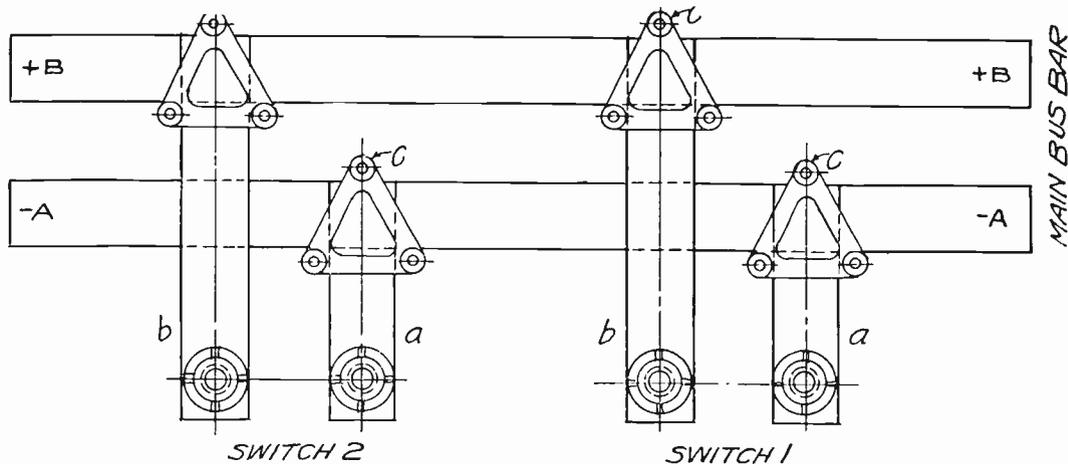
Bus bars can be connected together by means of special clamps as shown above. These clamp pieces are held securely gripped to the busses by means of short bolts through the holes in their three corners. Clamps of this type save the trouble of drilling the copper busses.
